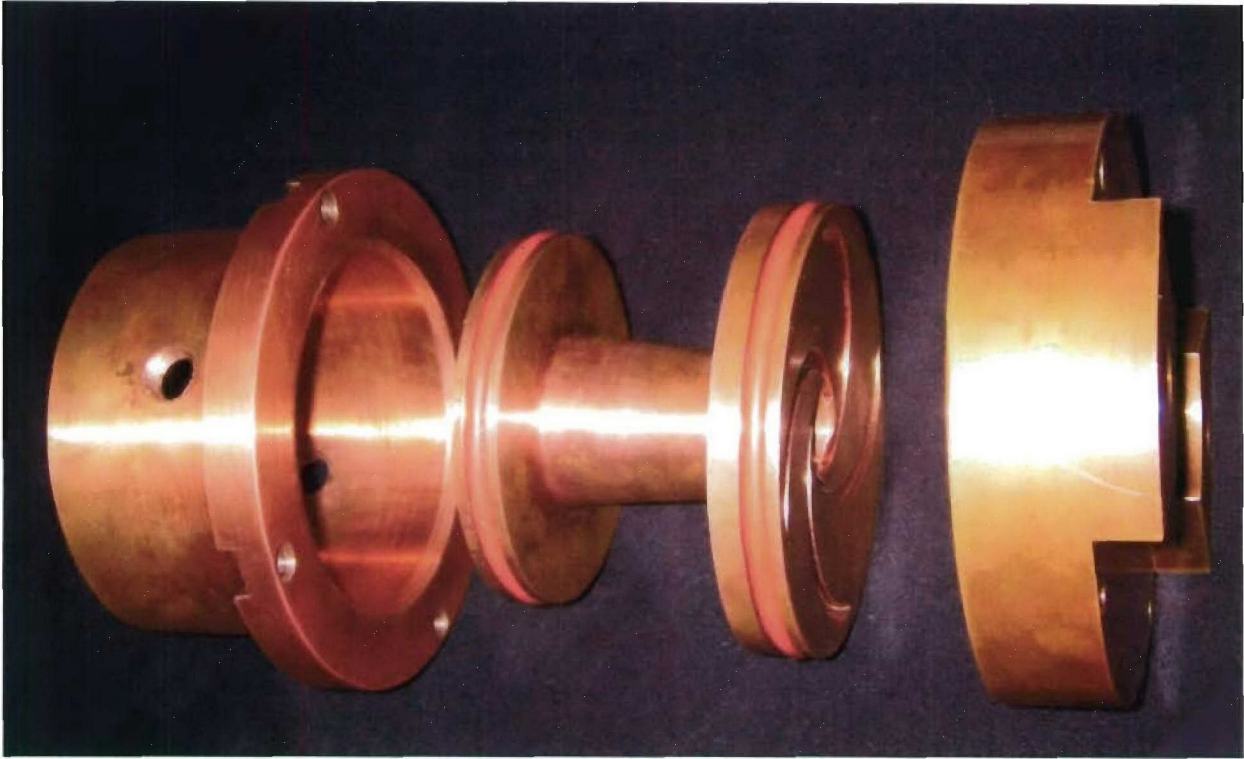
The three part plasma shroud assembly for the SG-100 air plasma spray gun.
